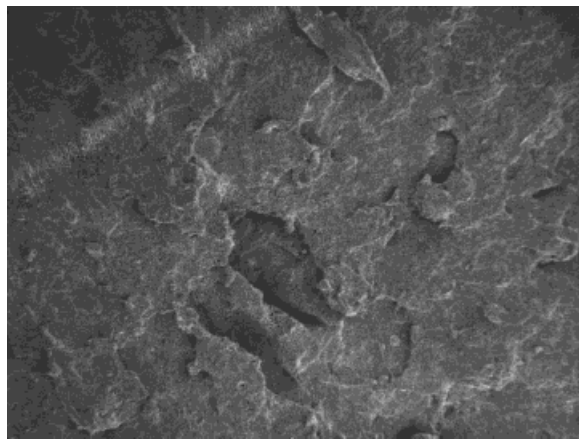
SEM fractography of a tensile fractured specimen of N_4 after aging at 100°C (original magnification $\times 500$).
